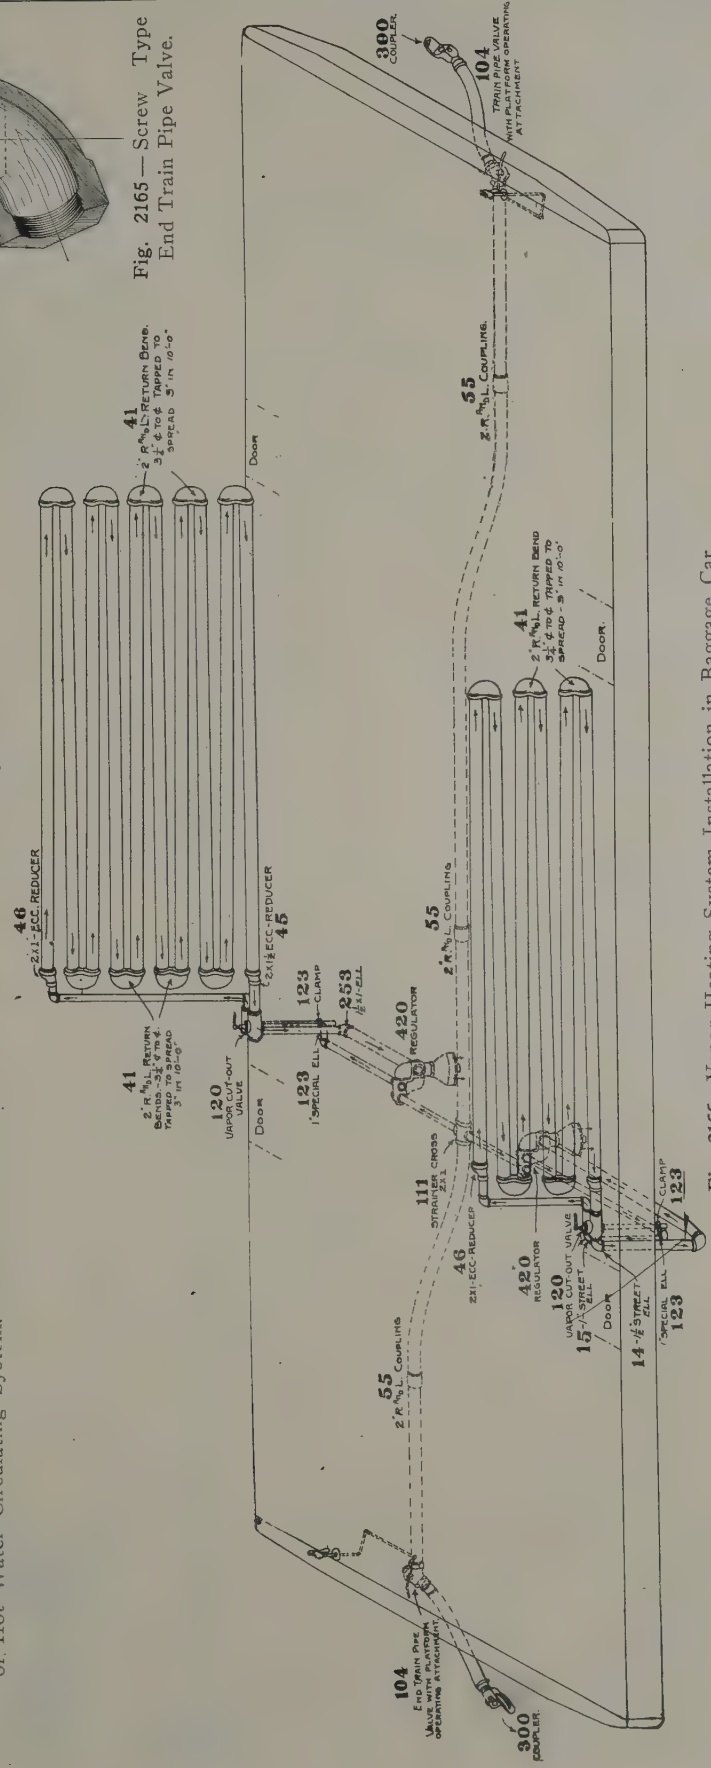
Vapor Heating System Installation in Baggage Car.
